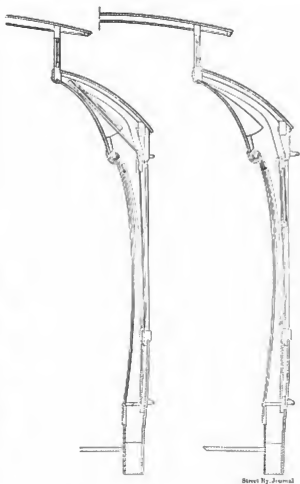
DETAILS OF ARRANGEMENT OF STORING SASH
